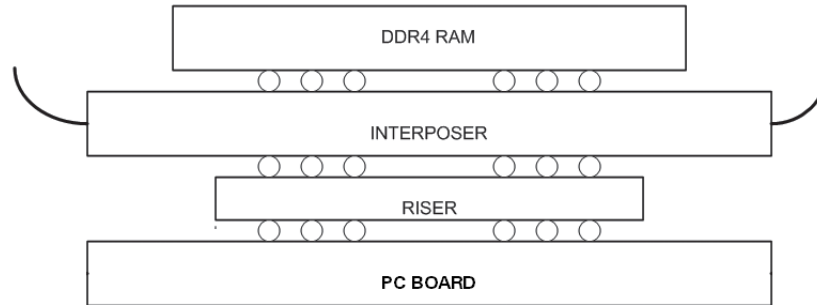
PC board, riser (or optional Grypper socket), interposer, and DRAM stack up
